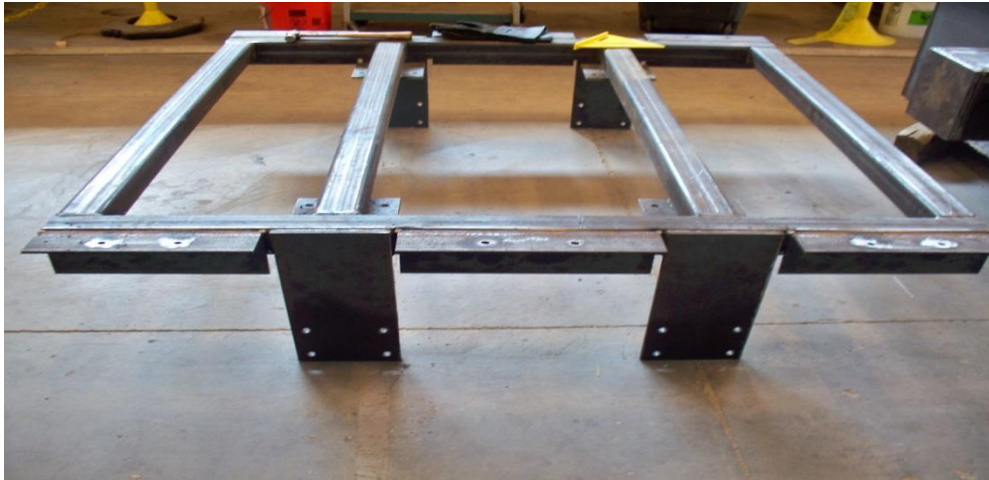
Cart frame with caster connection plates and concrete block attachment angles.
